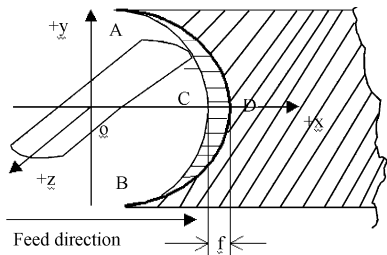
The cutter movement of stable cutting. ACB — movement of the in-cut tooth. ADB — movement of the next tooth.
